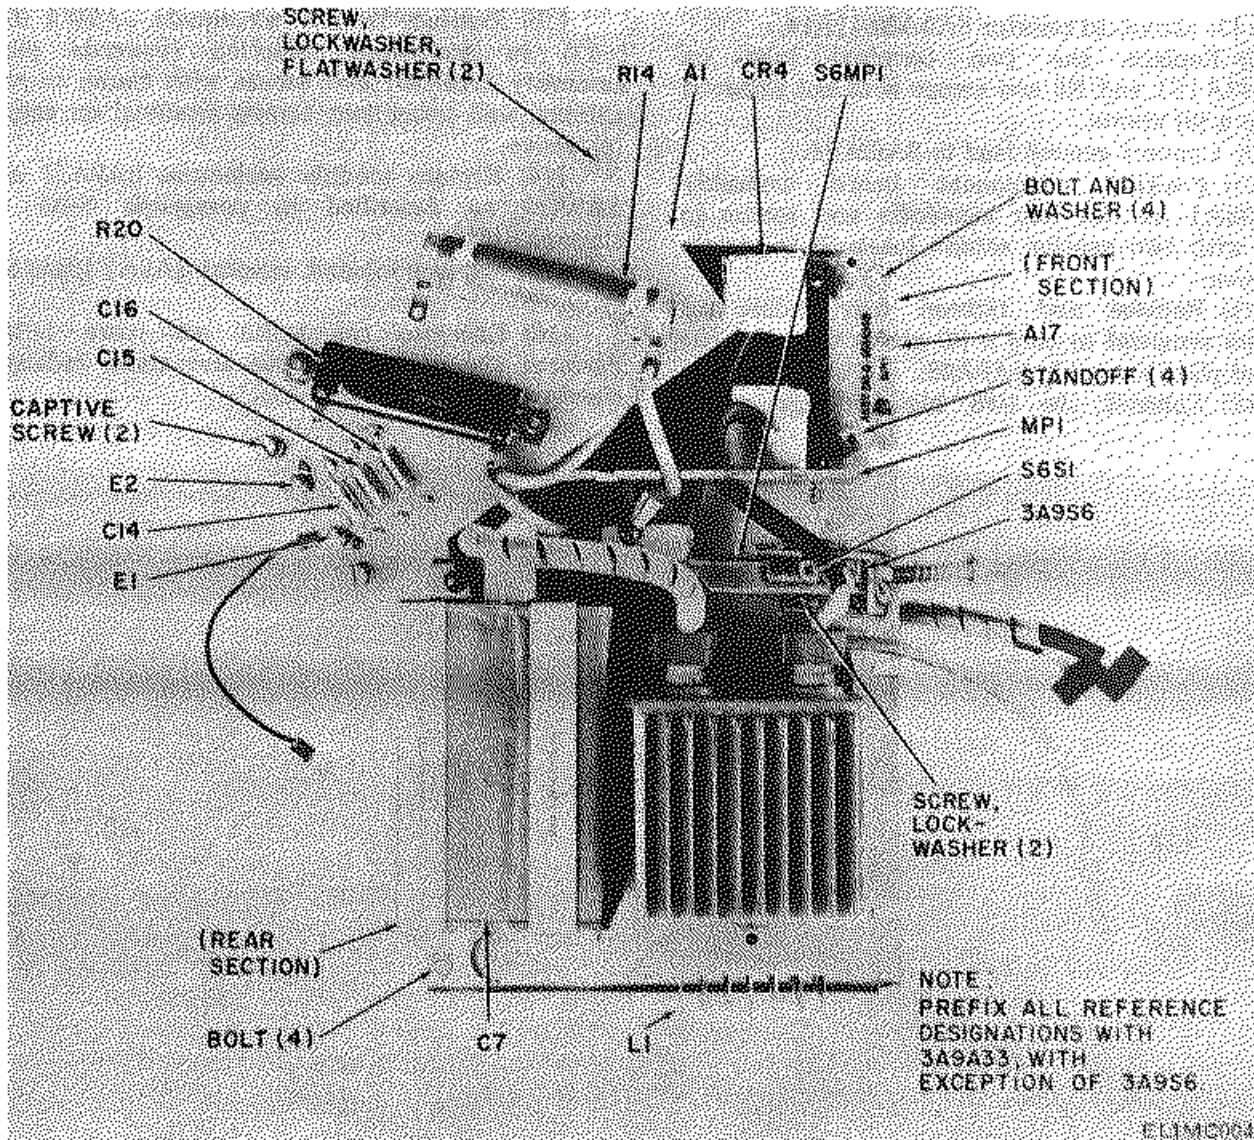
Plate assembly 3A9A33, top view, parts location, (part NO. 653434B).
